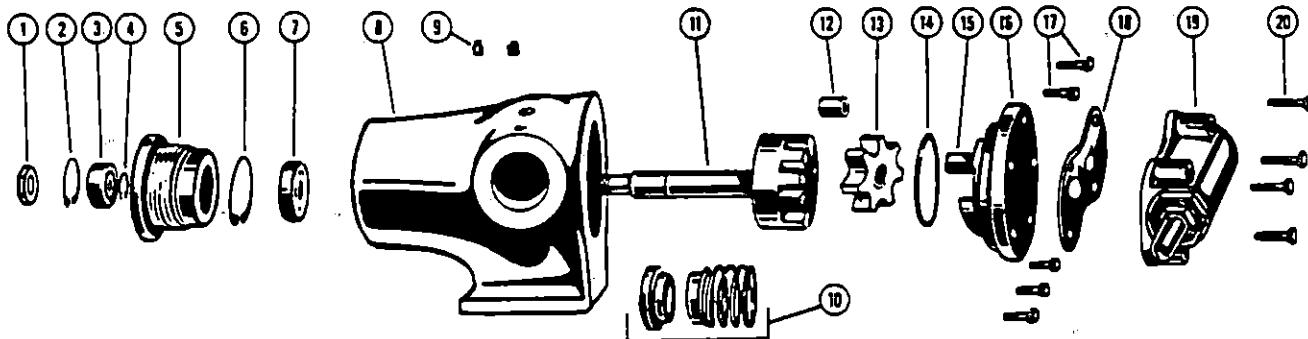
EXPLODED VIEW GG, HJ, HL195 PUMPS
